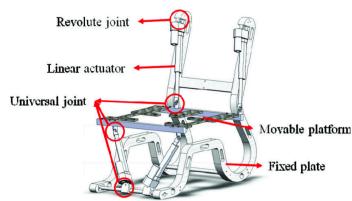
CAD Model of Elevating Wheelchair Final Design
